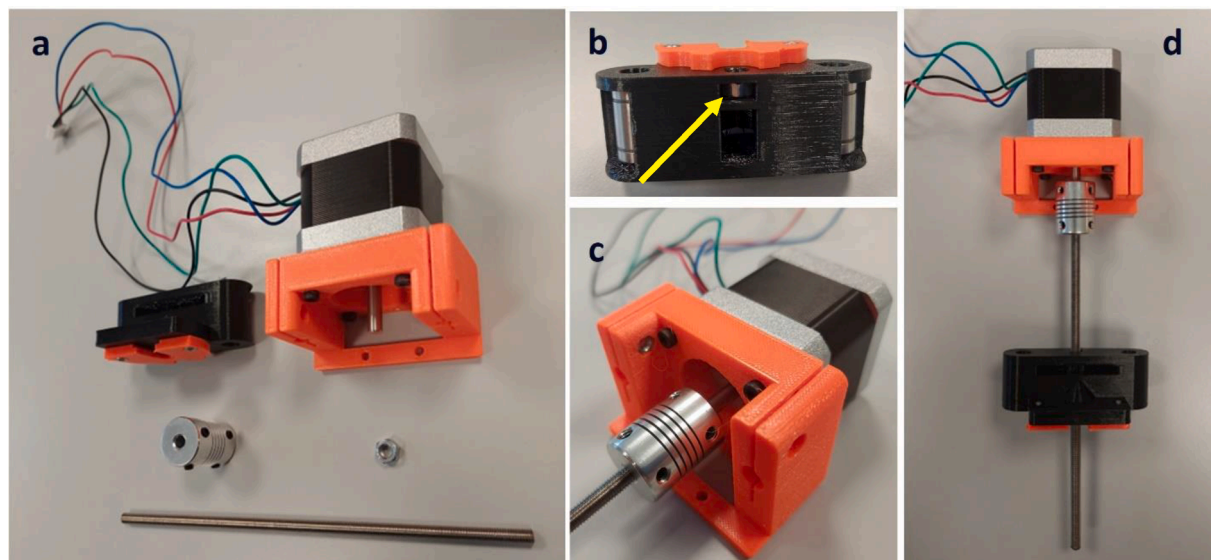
Construction of the motion transformation parts: (a) Exploded view of the required parts. (b) The hexagon nut is inserted into the carriage. (c) The coupling is installed to the NEMA 17 stepper motor. (d) Top view of the motion transformation section.
